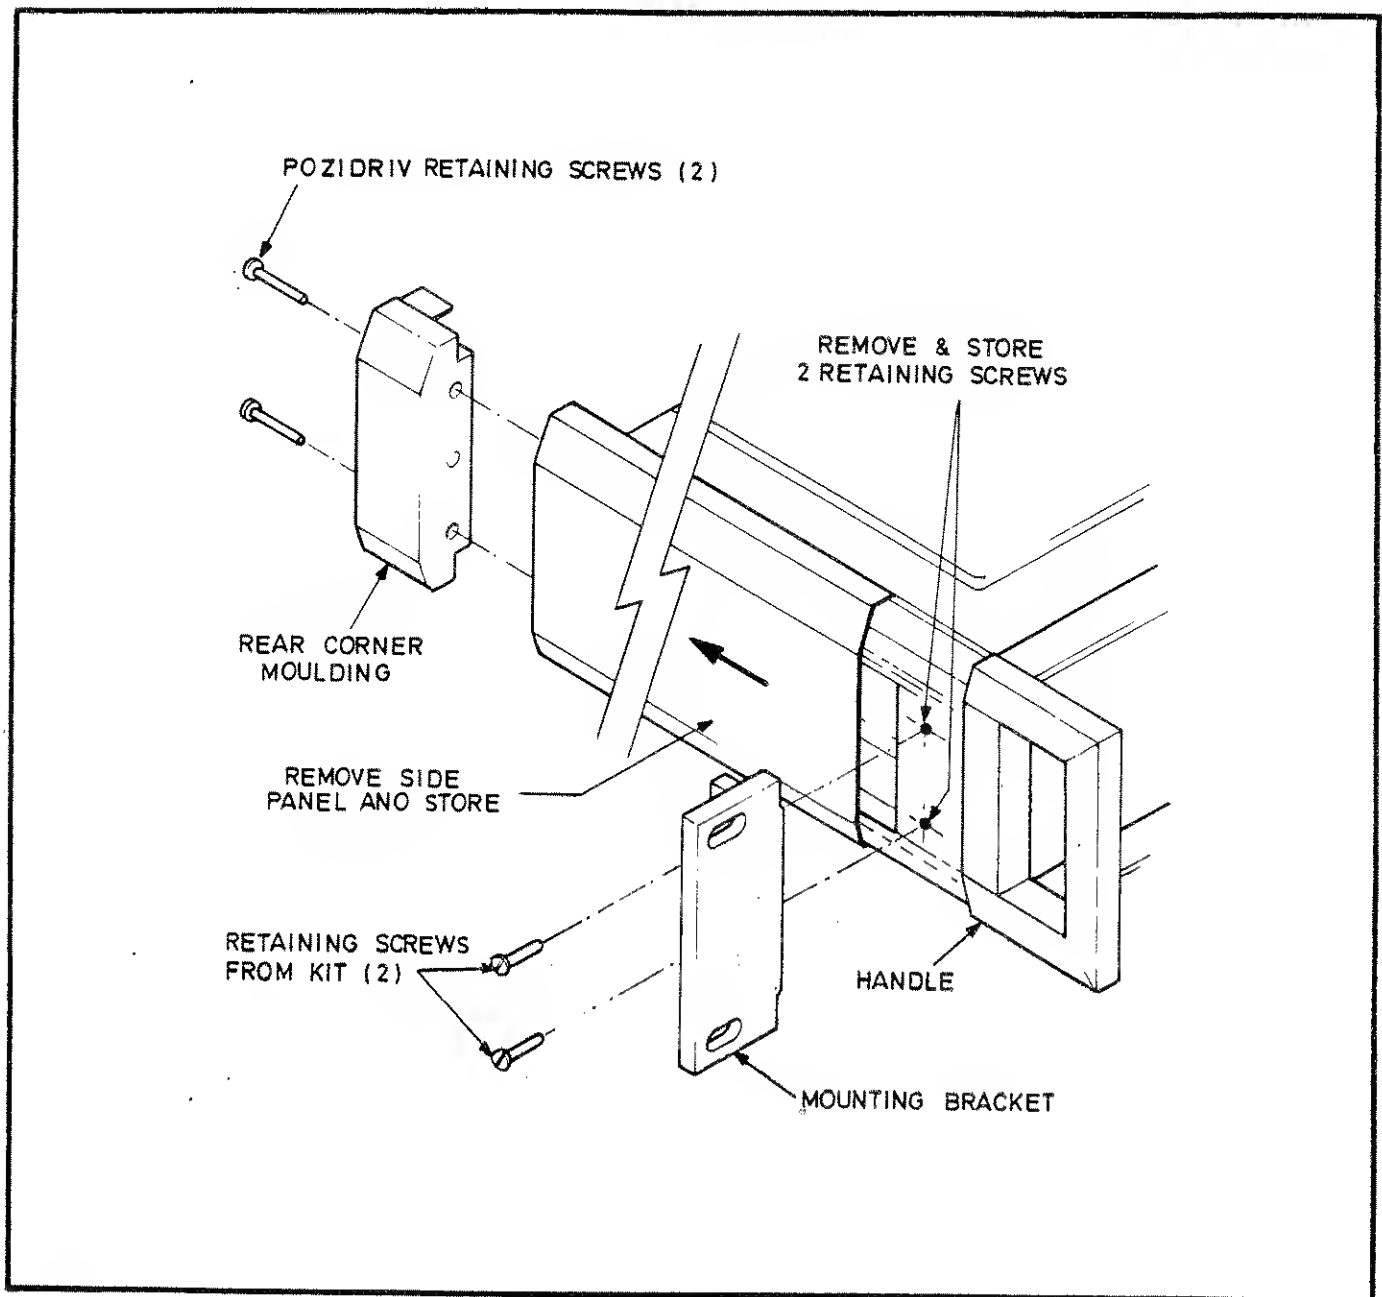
Fitting the Rack Mounting Kit 11-1576
